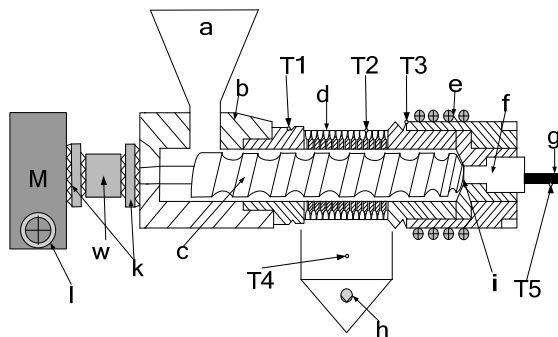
Mechanical screw press for oil extraction and installed sensor, (a) feeding hopper, (b) housing, (c) screw press, (d) oil outlet holes, (e) block heater, (f) nozzle, (g) press cake outlet, (i) cohesion zone, (h) oil collector, (k) coupling, (l) speed alternator, (M) motor, (T1-T4) temperature sensors, (T5) temperature sensor (IR), (ω) rotational speed
